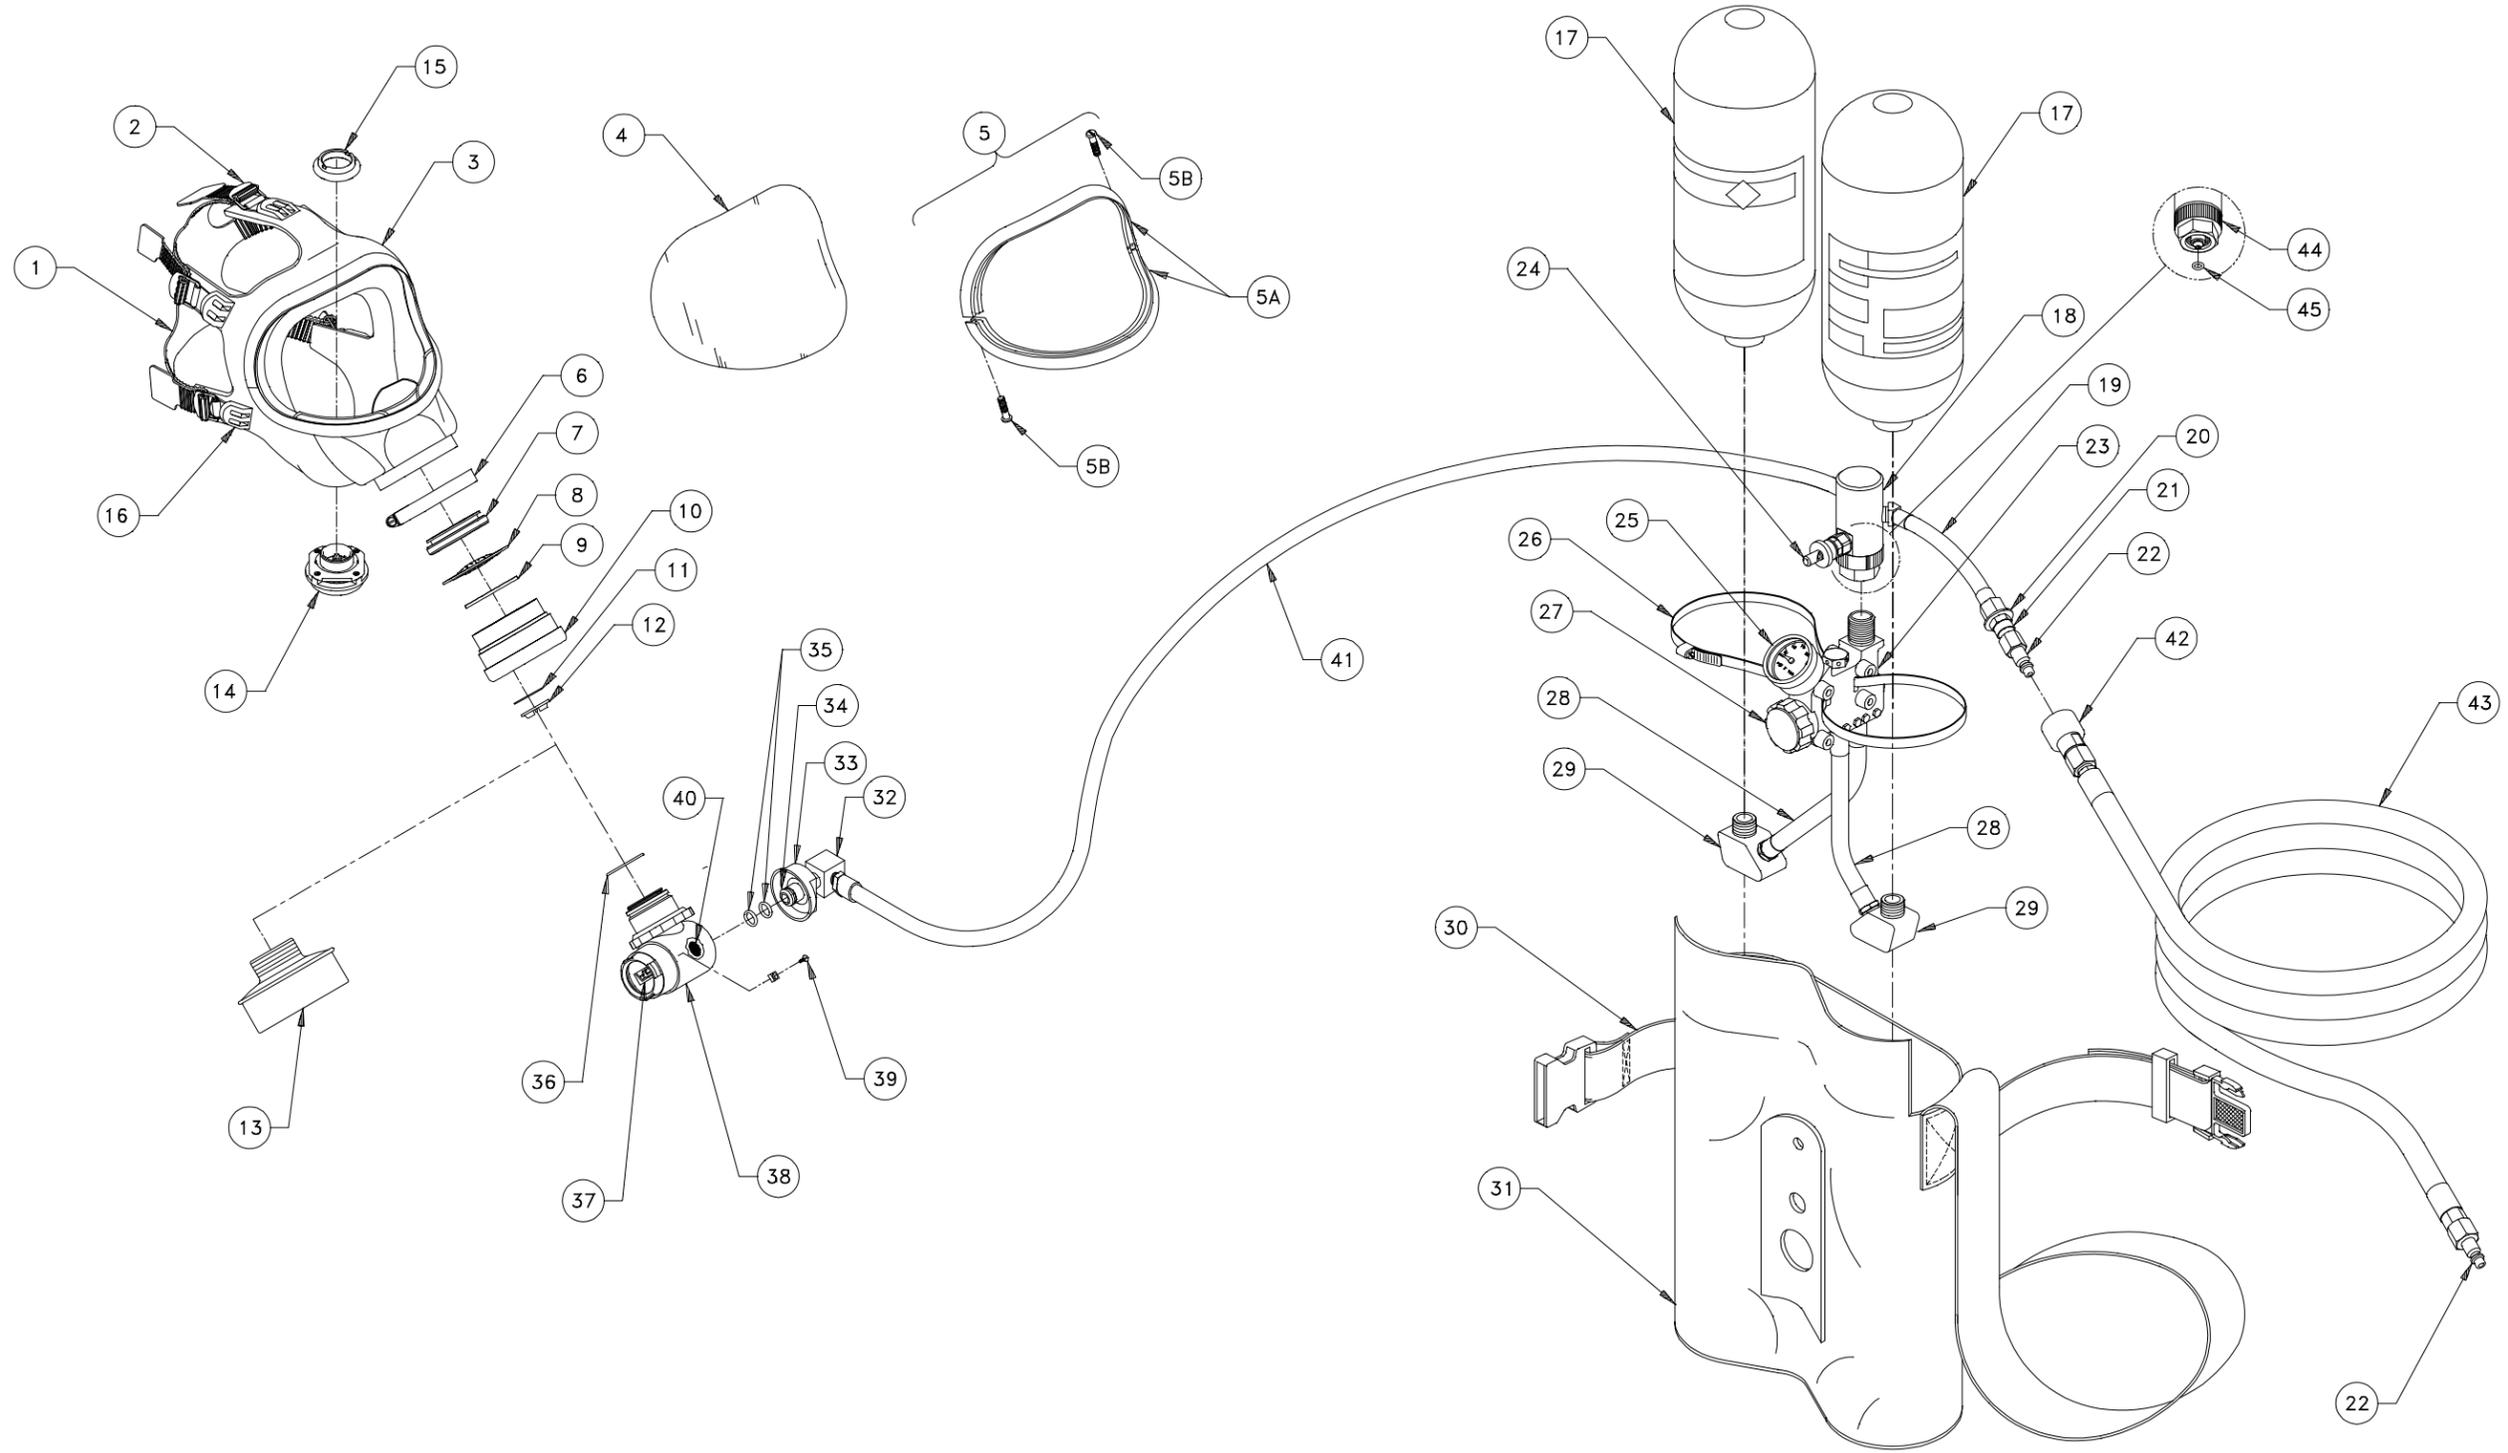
Self-Contained Breathing Apparatus (SCBA)
